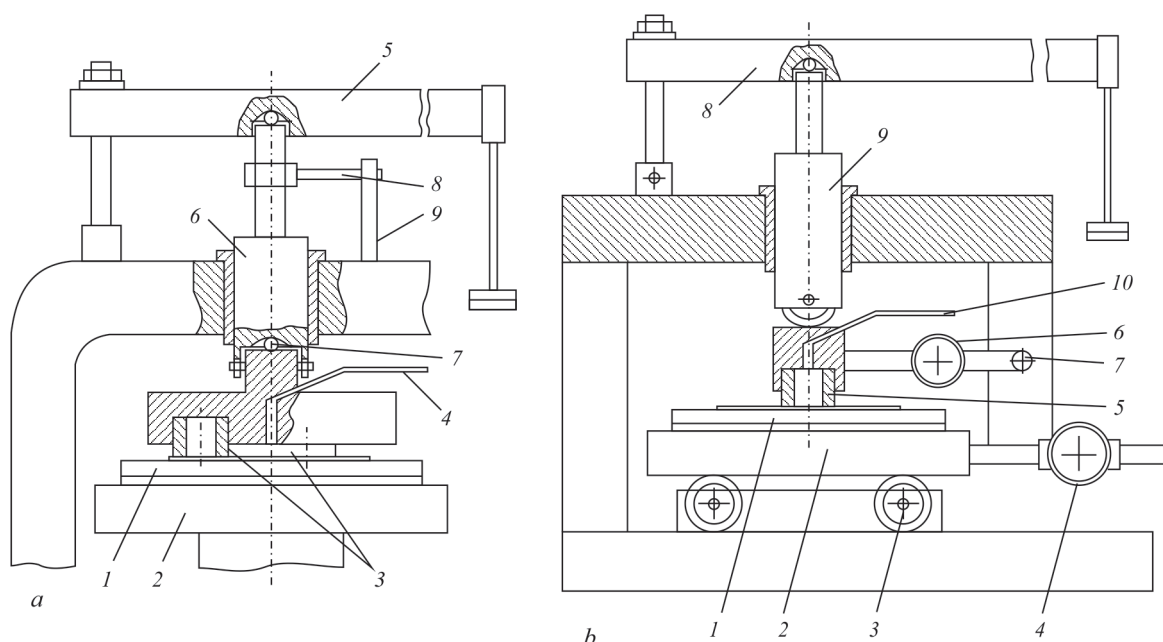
Schemes of the main units of friction machines: *a* — working unit of end friction machine; *b* — working unit of a reverse-friction machine
